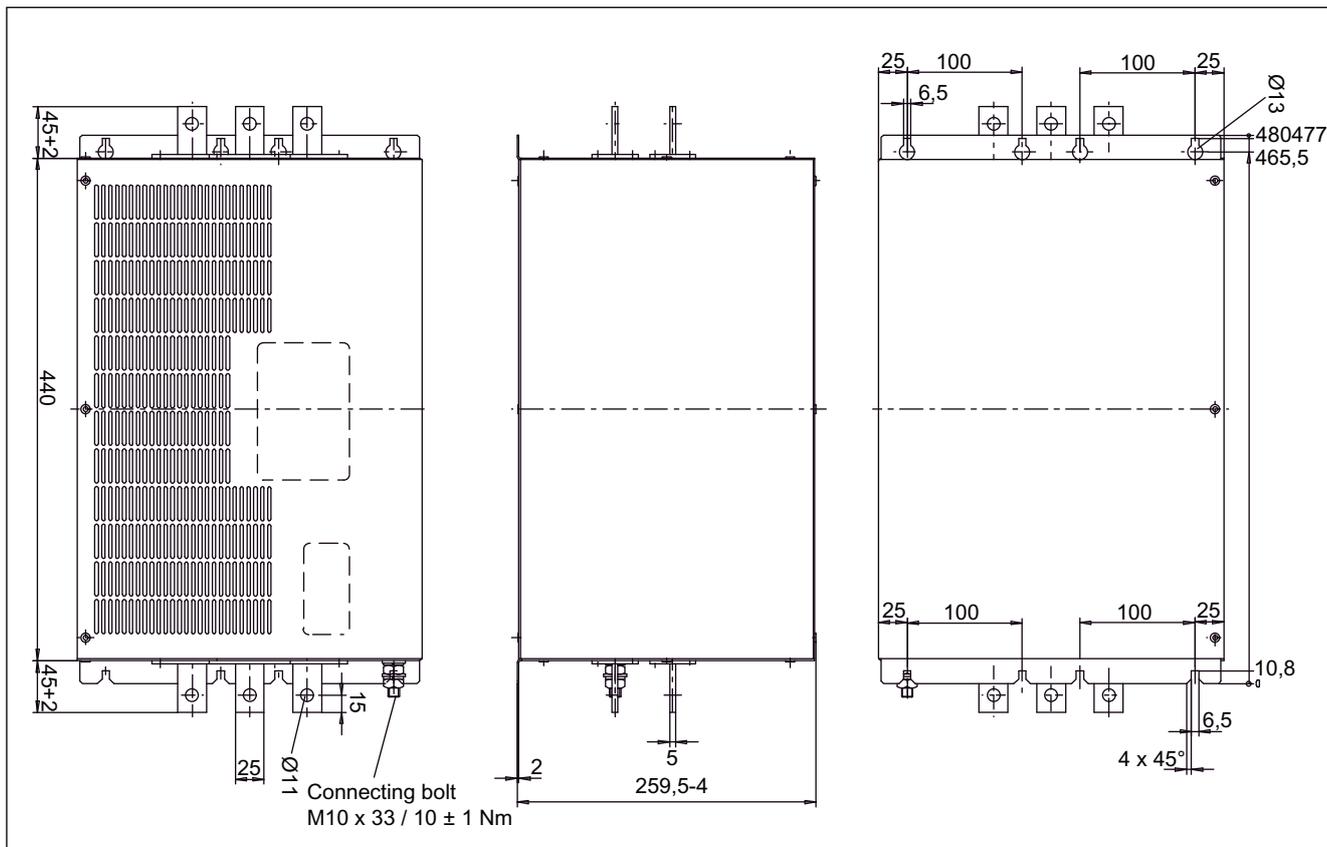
Dimension drawing: 120 kW Wideband Line Filter for Active Line Modules
